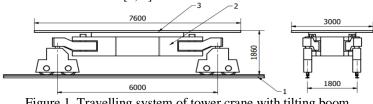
Travelling system of tower crane with tilting boom *1* - rolling gtrack, 2 – Slewing mechanism, 3 – slewing platfo
